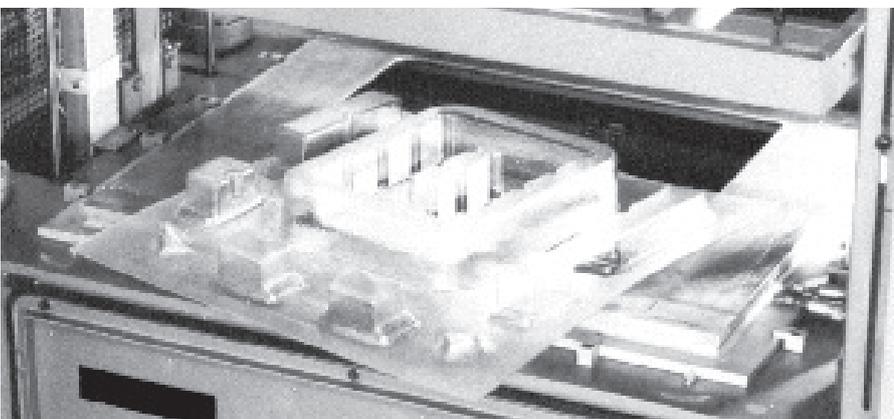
Thermoforming a wall box on a vacuum-forming machine
